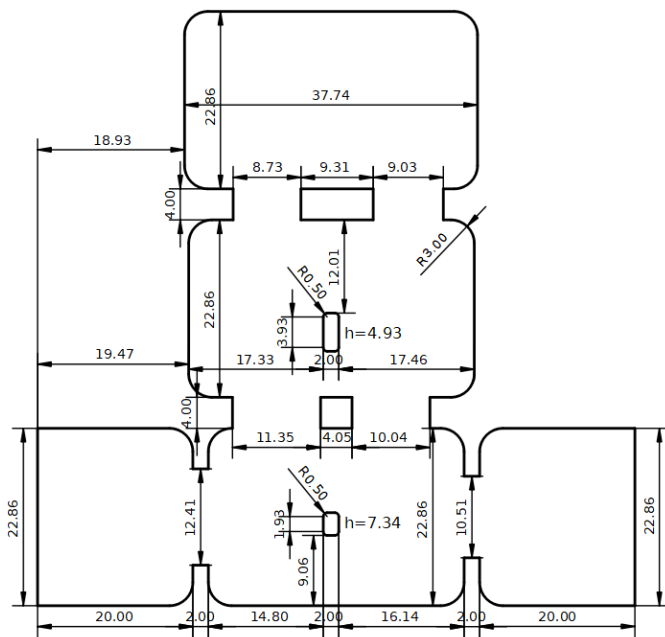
Layout of the waveguide DDS with indication of dimensions (in mm).
